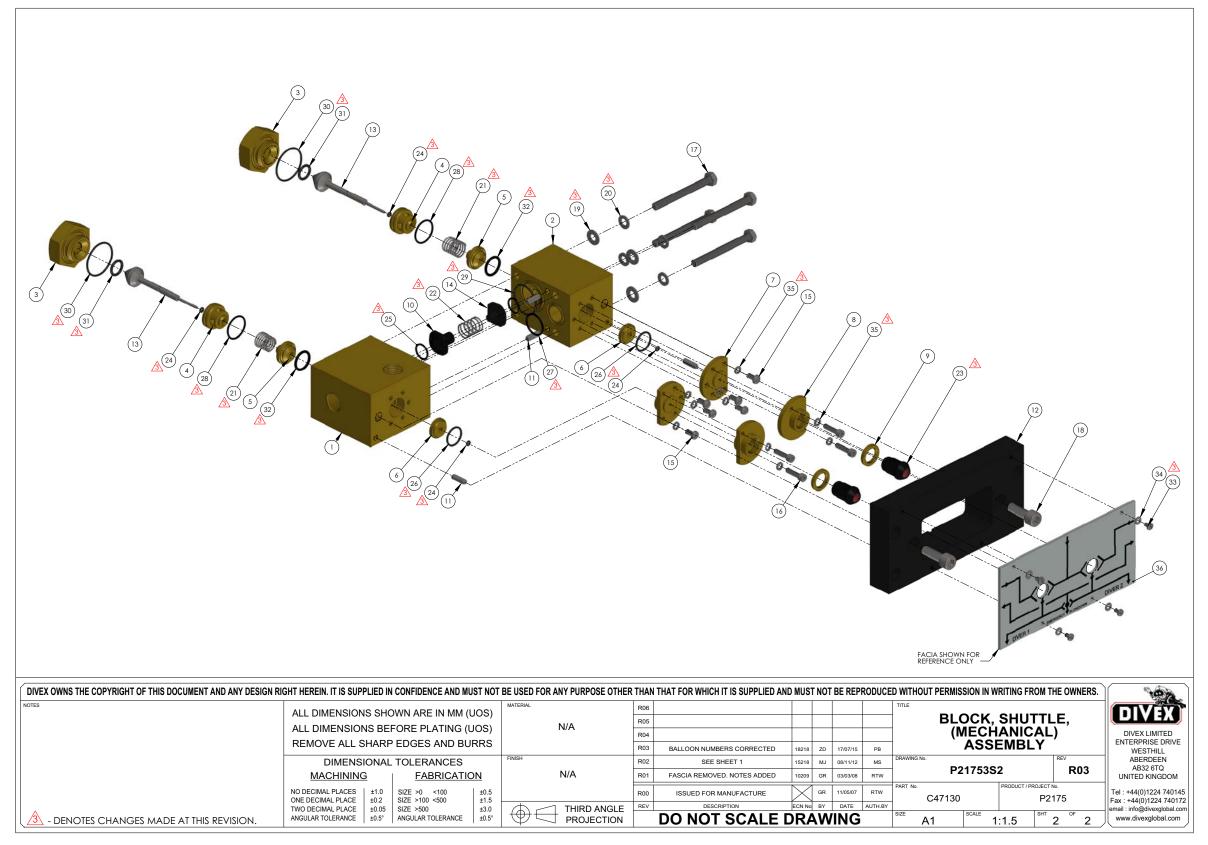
Shuttle block mechanical assembly (Drawing P21753S2)
